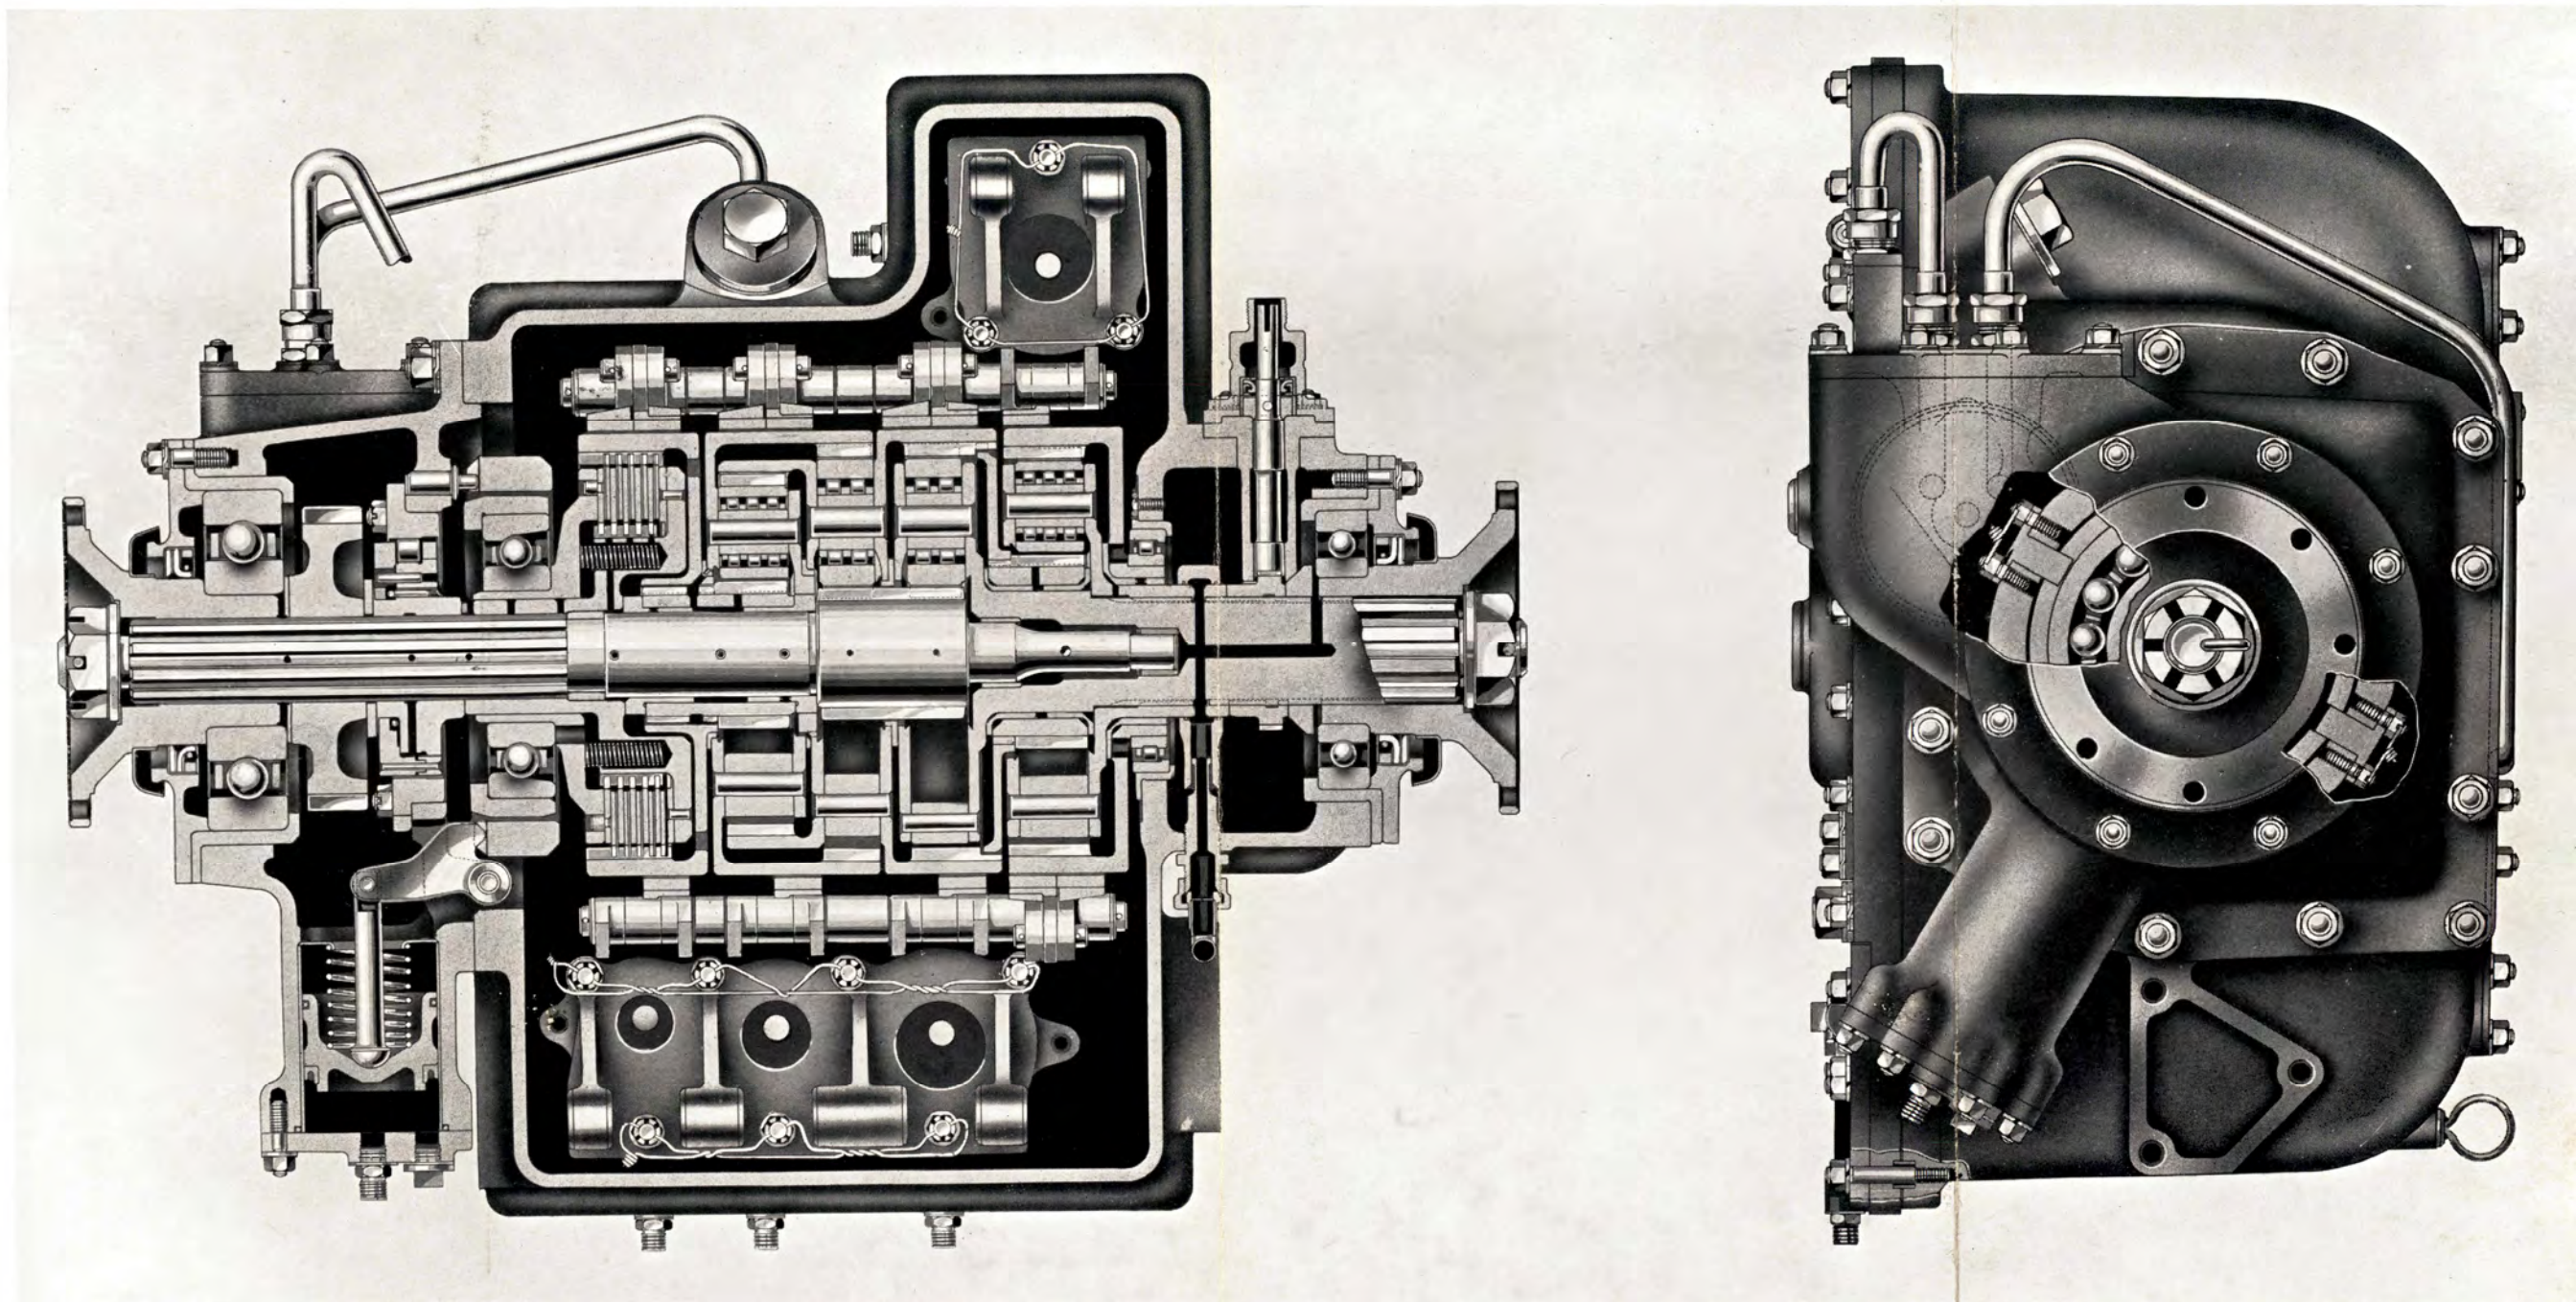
SECTION THROUGH THE GEARBOX AND PART CUT-AWAY END VIEW
